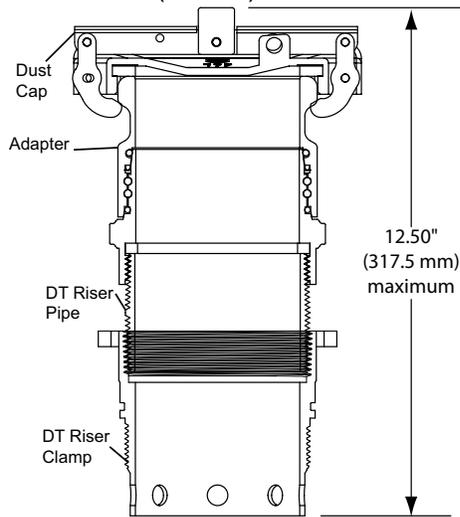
Drop Tube (DT) Riser Clamp Assembly Dimensions
